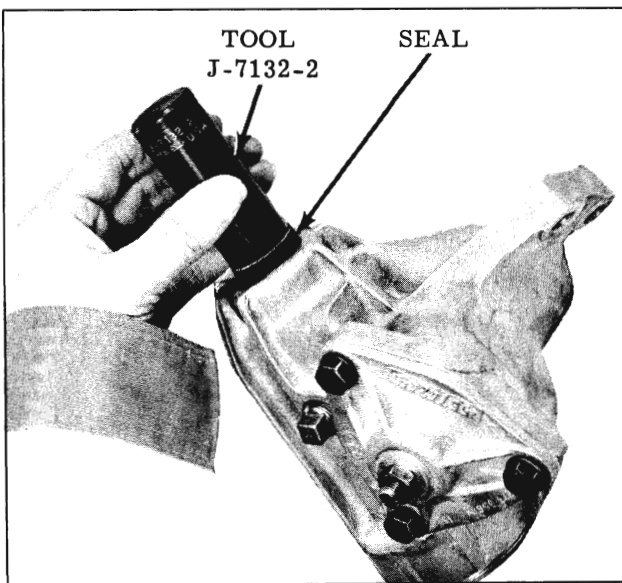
Installing Wormshaft Seal- Gear Assembled
